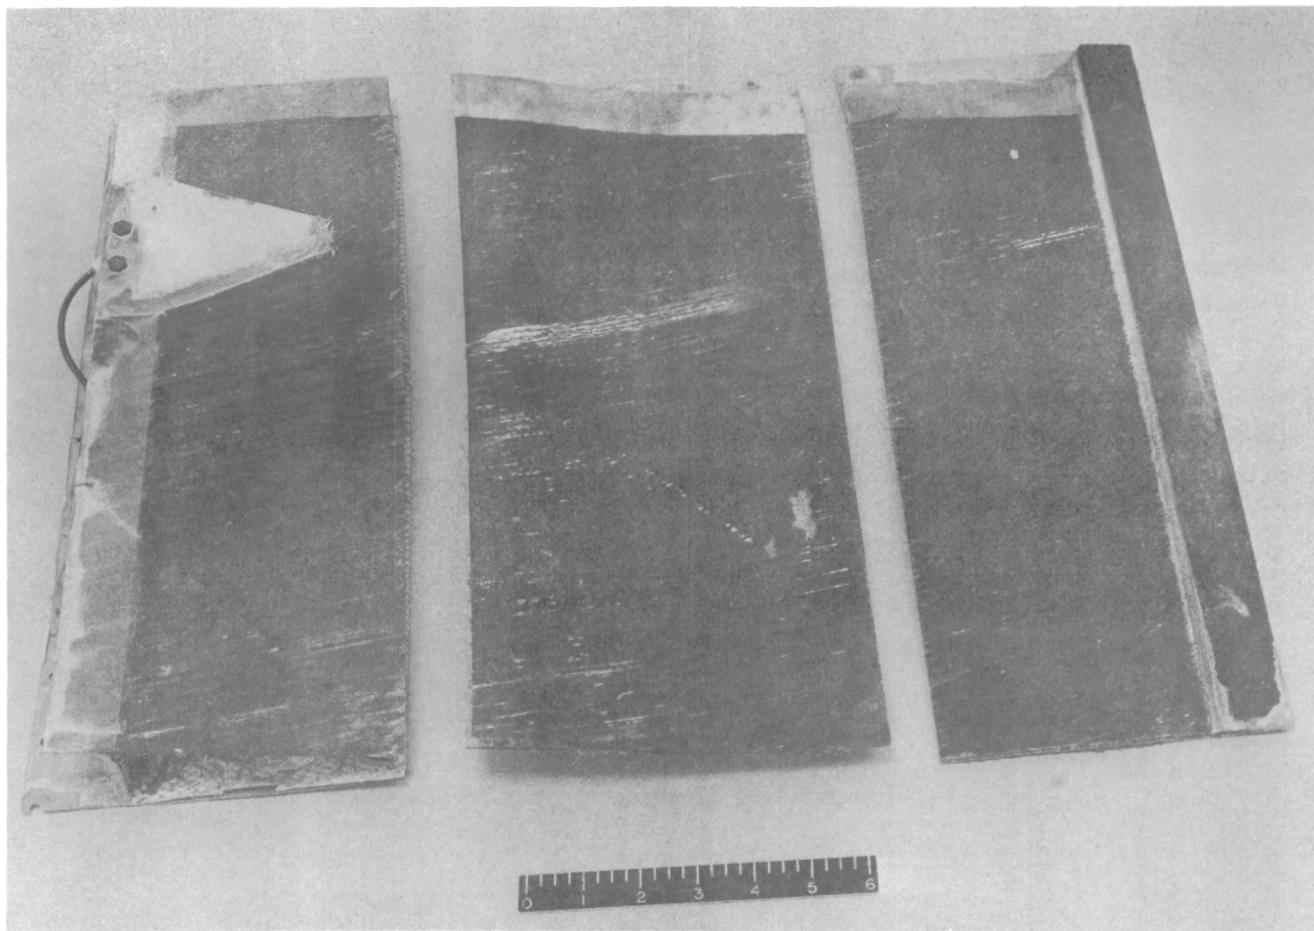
Chem-Milled Sections of -3 Test Spoiler
